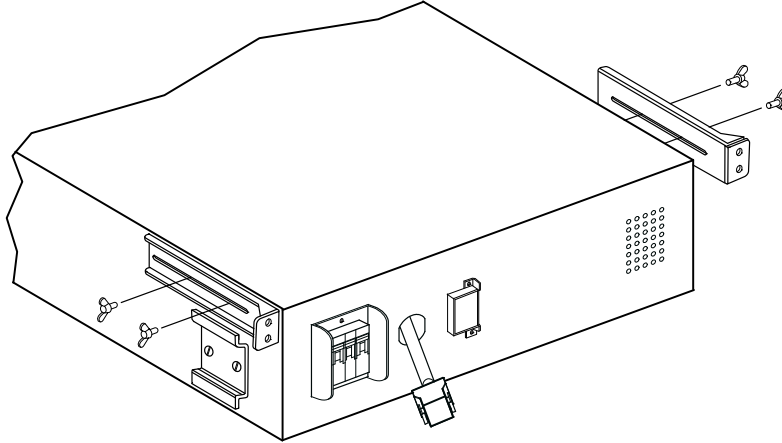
Installing the Optional EBM Seismic Mounting Brackets
